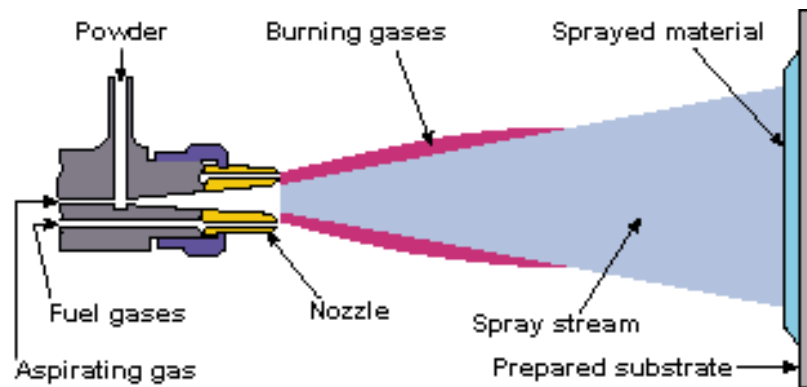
Powder spray (TWI-The Welding Institute)
